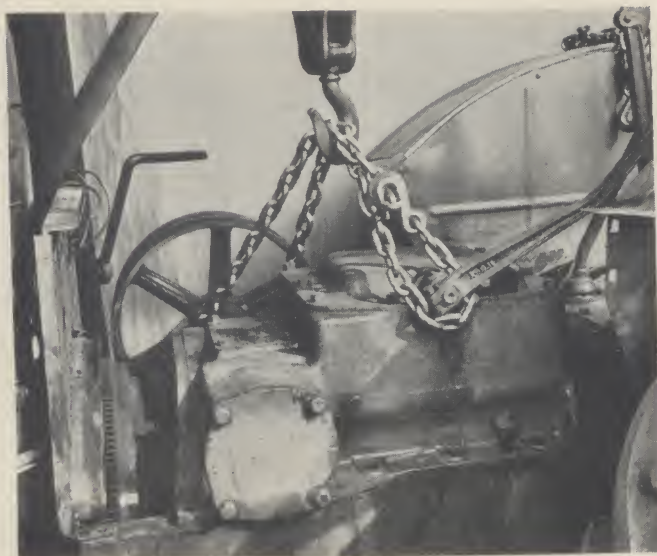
Removing belt pulley carrier from 4 speed tractors. Unit will be easier to handle if pulley is removed before removing carrier unit.
